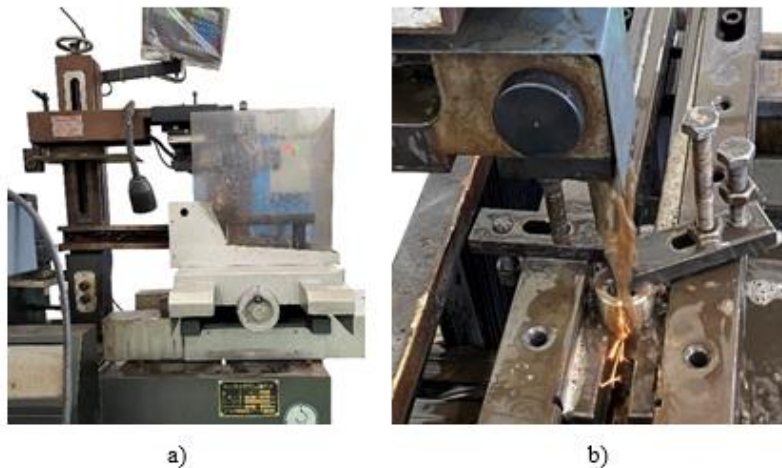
Disassembling the interference-fitted joints by (a) wire EDM machine with (b) a proportional cutting set up
